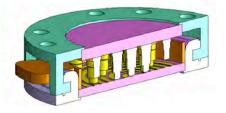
Assembled Universal Coupler, Concept 3. When the two halves in Figure 8 are pushed together and rotated 30°, the lock ring (orange) snaps into the position shown by the wing exposed on the left, preventing rotation. To uncouple, the user lifts (distal-direction) on the two locking ring wings and rotates 30° to the unlock orientation.
